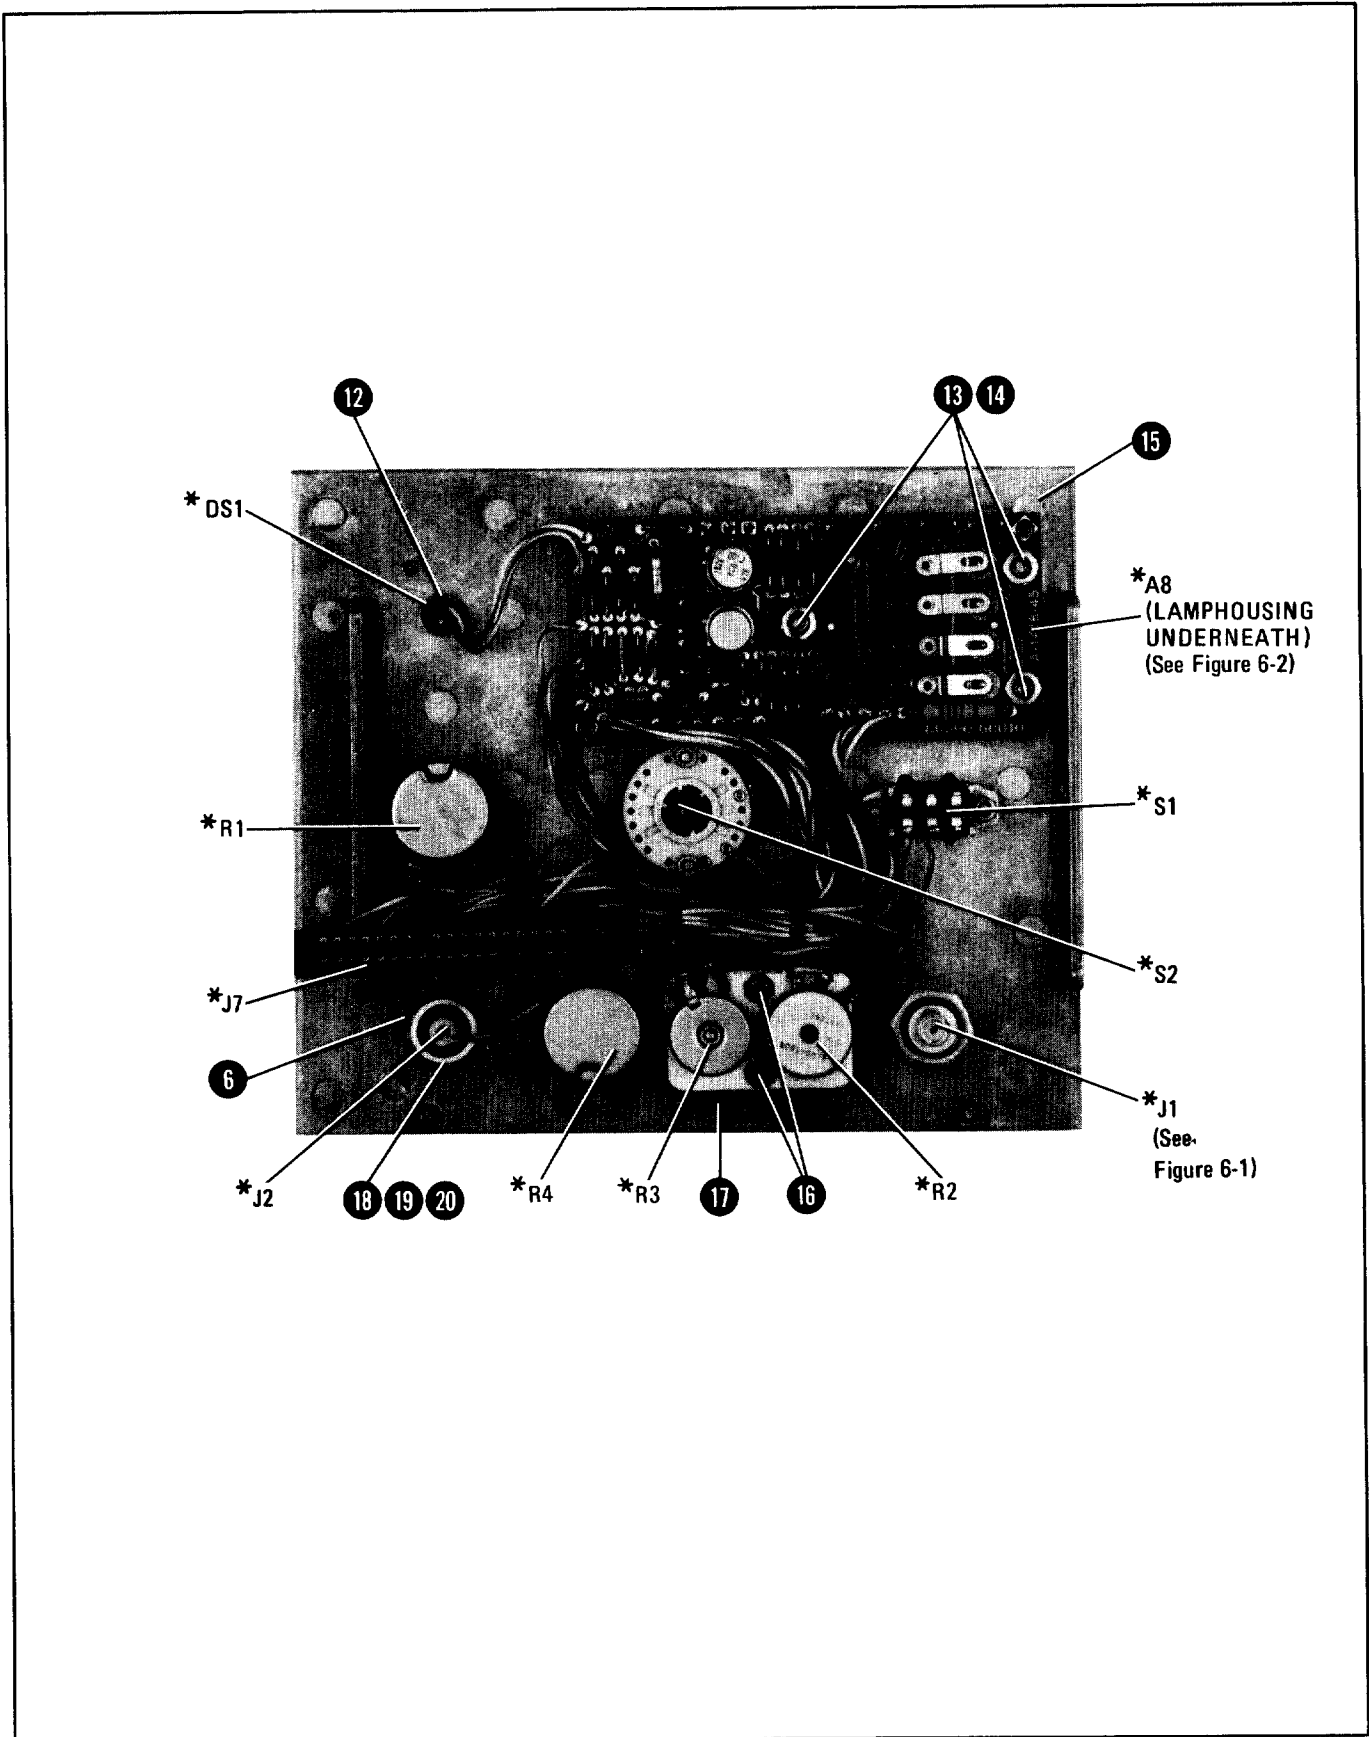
Front Panel Parts Identification (CHANGE F)
